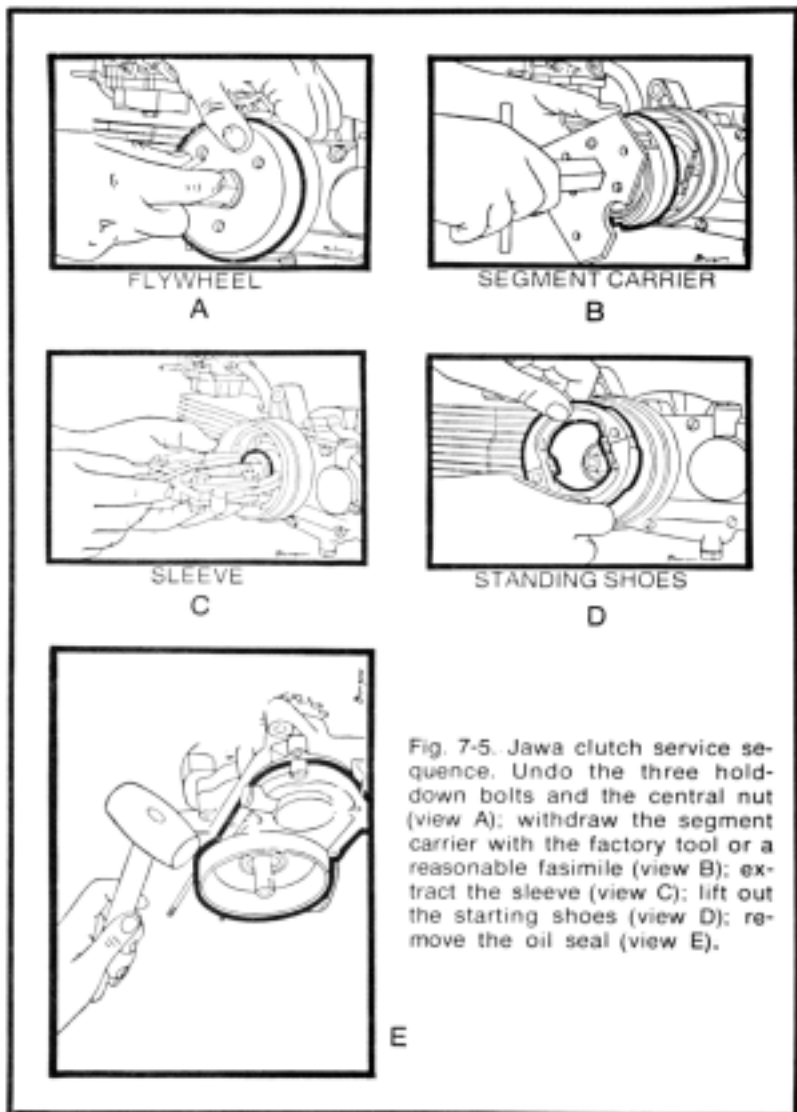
Jawa clutch service sequence. Undo the three hold-down bolts and the central nut (view A); withdraw the segment carrier with the factory tool or a reasonable facsimile (view B); extract the sleeve (view C); lift out the starting shoes (view D); remove the oil seal (view E).
